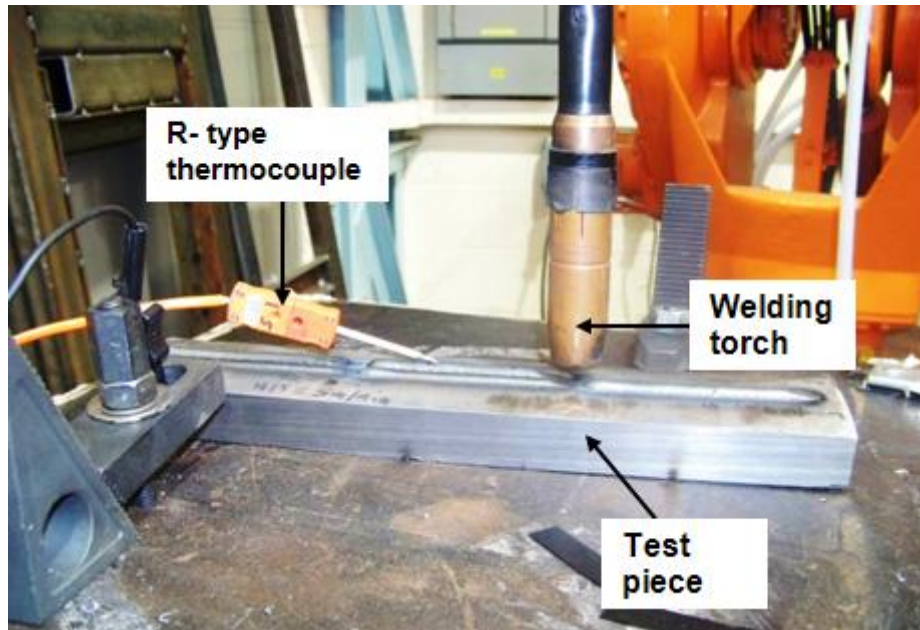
A completed weld showing the thermocouple inside the weld metal
